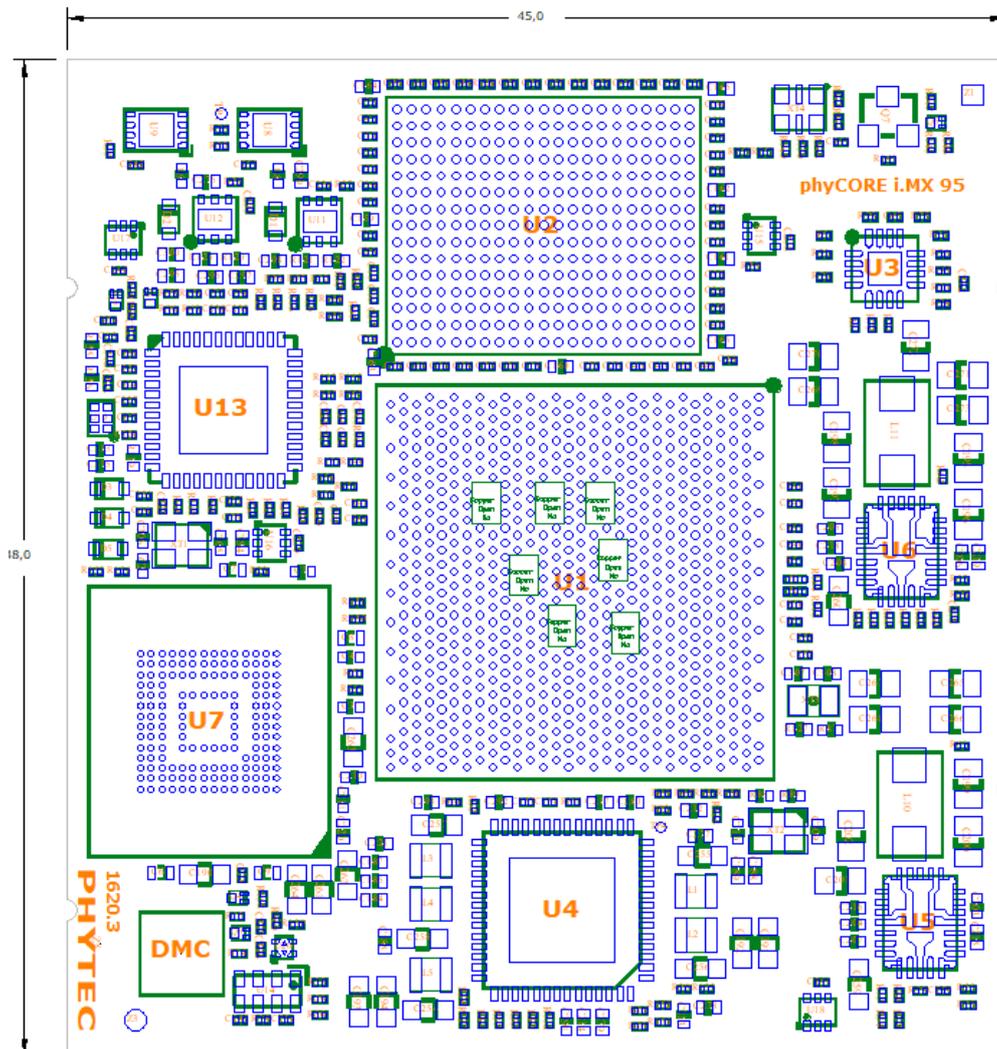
phyFLEX-i.MX 95 FPSC Footprint (top to bottom view; unit in mm)
